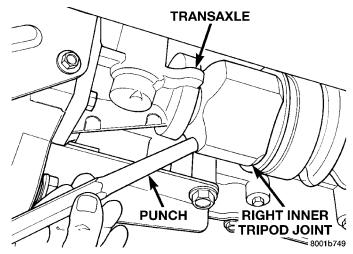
Disengaging Right Inner Tripod Joint from Transaxle
